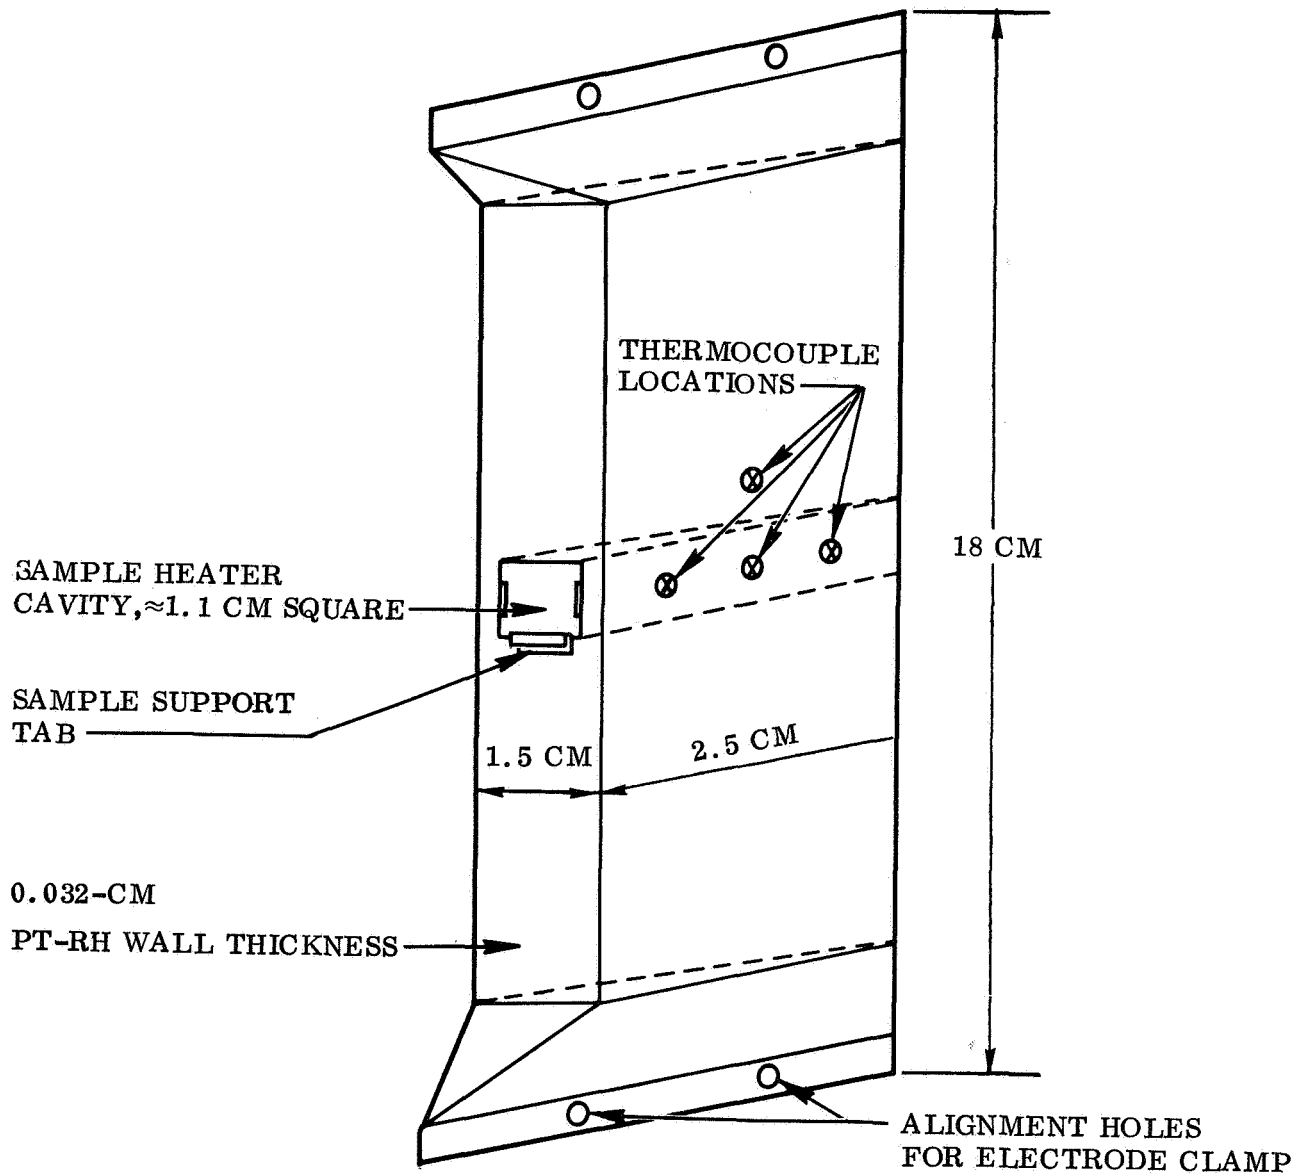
Sketch of Wedge-Shaped Heater Cavity Used for RSI Coating Sample Tests
